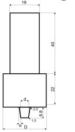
Tool: D=25 mm, d=5 mm i α =3°
